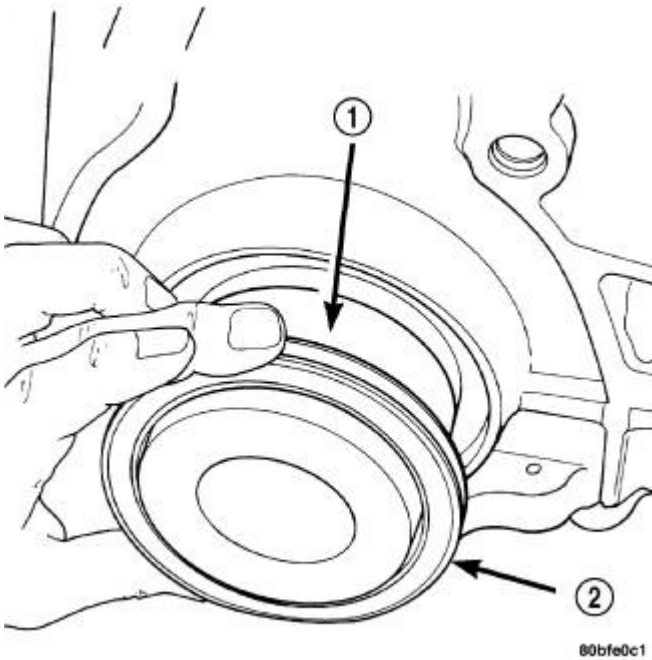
Rear Crankshaft Seal and Special Tool 6926-1
